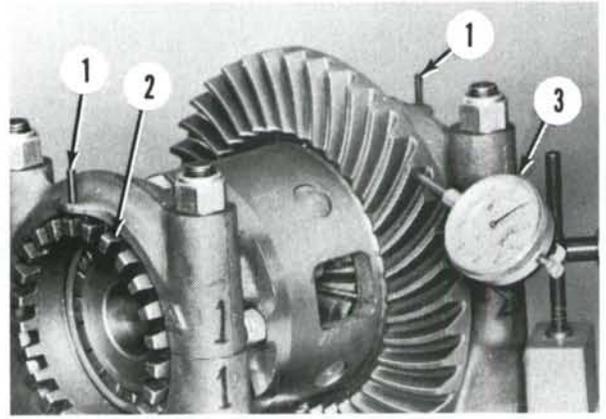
Dial indicator probe should be against outer tip of ring gear tooth when measuring backlash.
